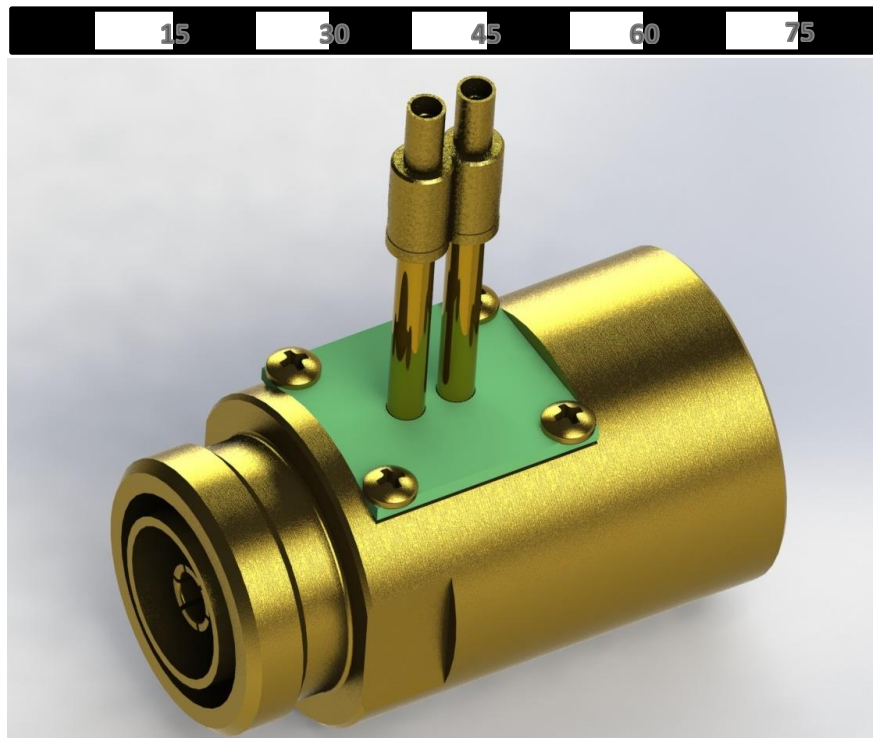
A 3D rendering of an assembled TXC test fixture with probe connections.
